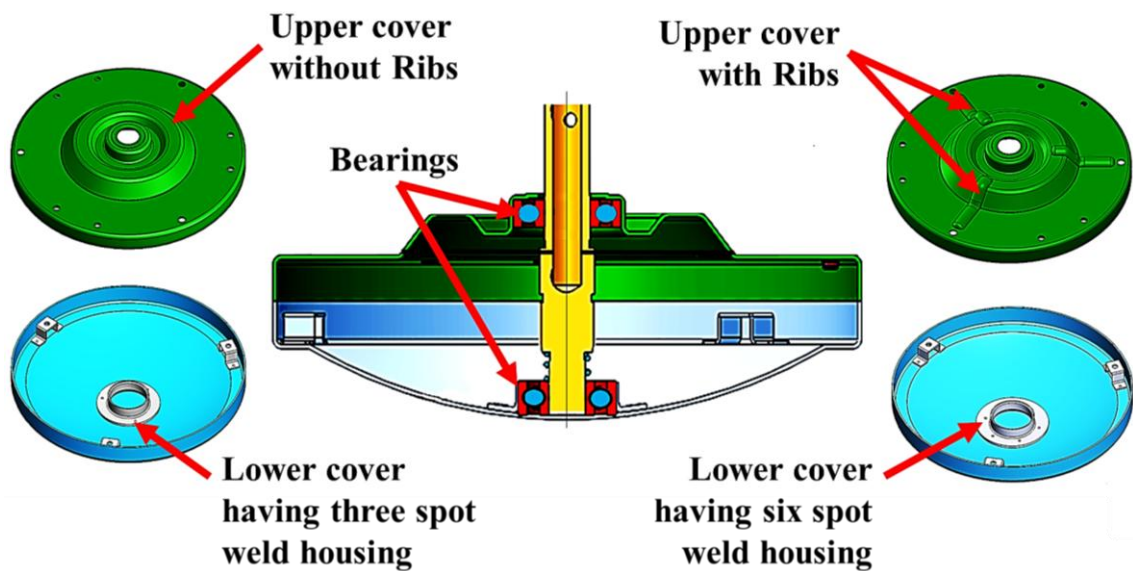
Upper and lower bearing housing configurations showing spot-weld locations and rib reinforcement used to vary structural stiffness.
